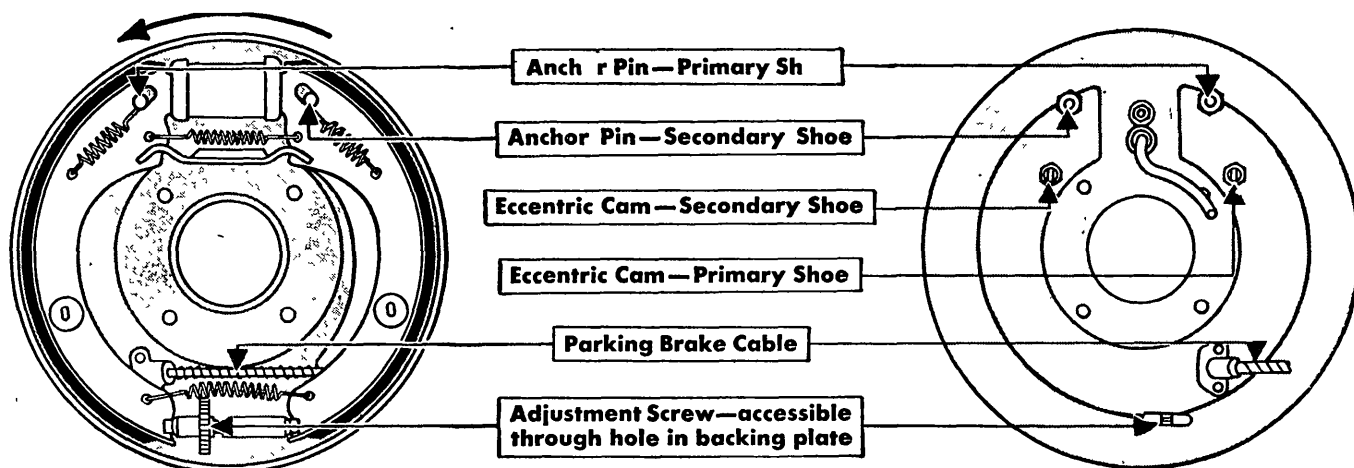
Bendix hydraulic double anchor brake with an eccentric adjustment for each shoe. Diagram shows left rear brake; front brake identical except for absence of parking brake
